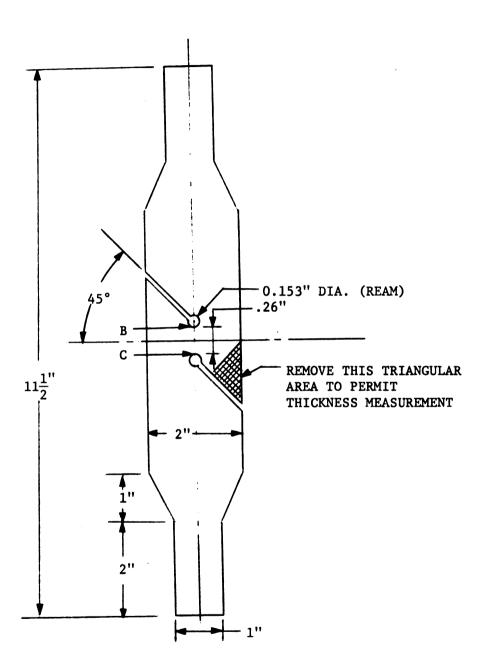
Half-Size Layout of the Single-Shear Test Coupon
